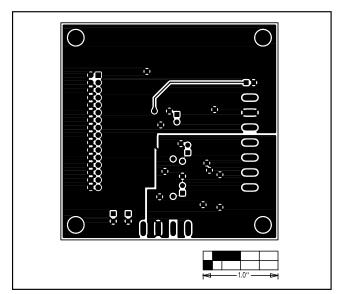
MAX1179 EV Kit PC Board Layout—Solder Side
